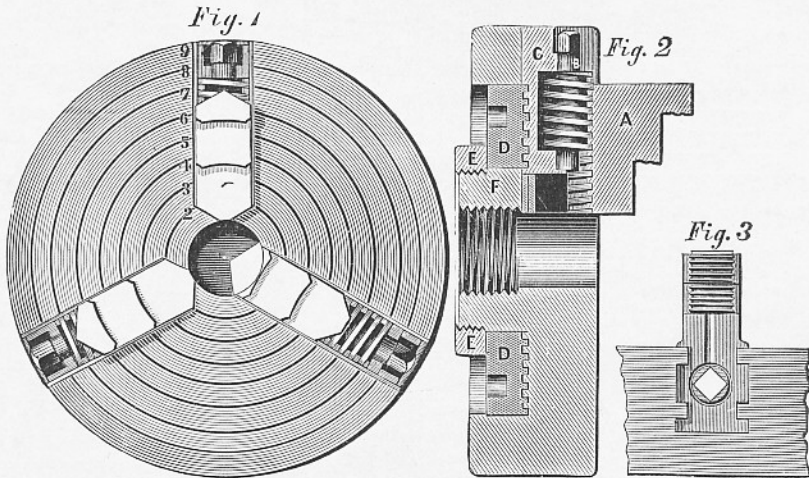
is a front view of the Chuck with one of the jaws reversed.
